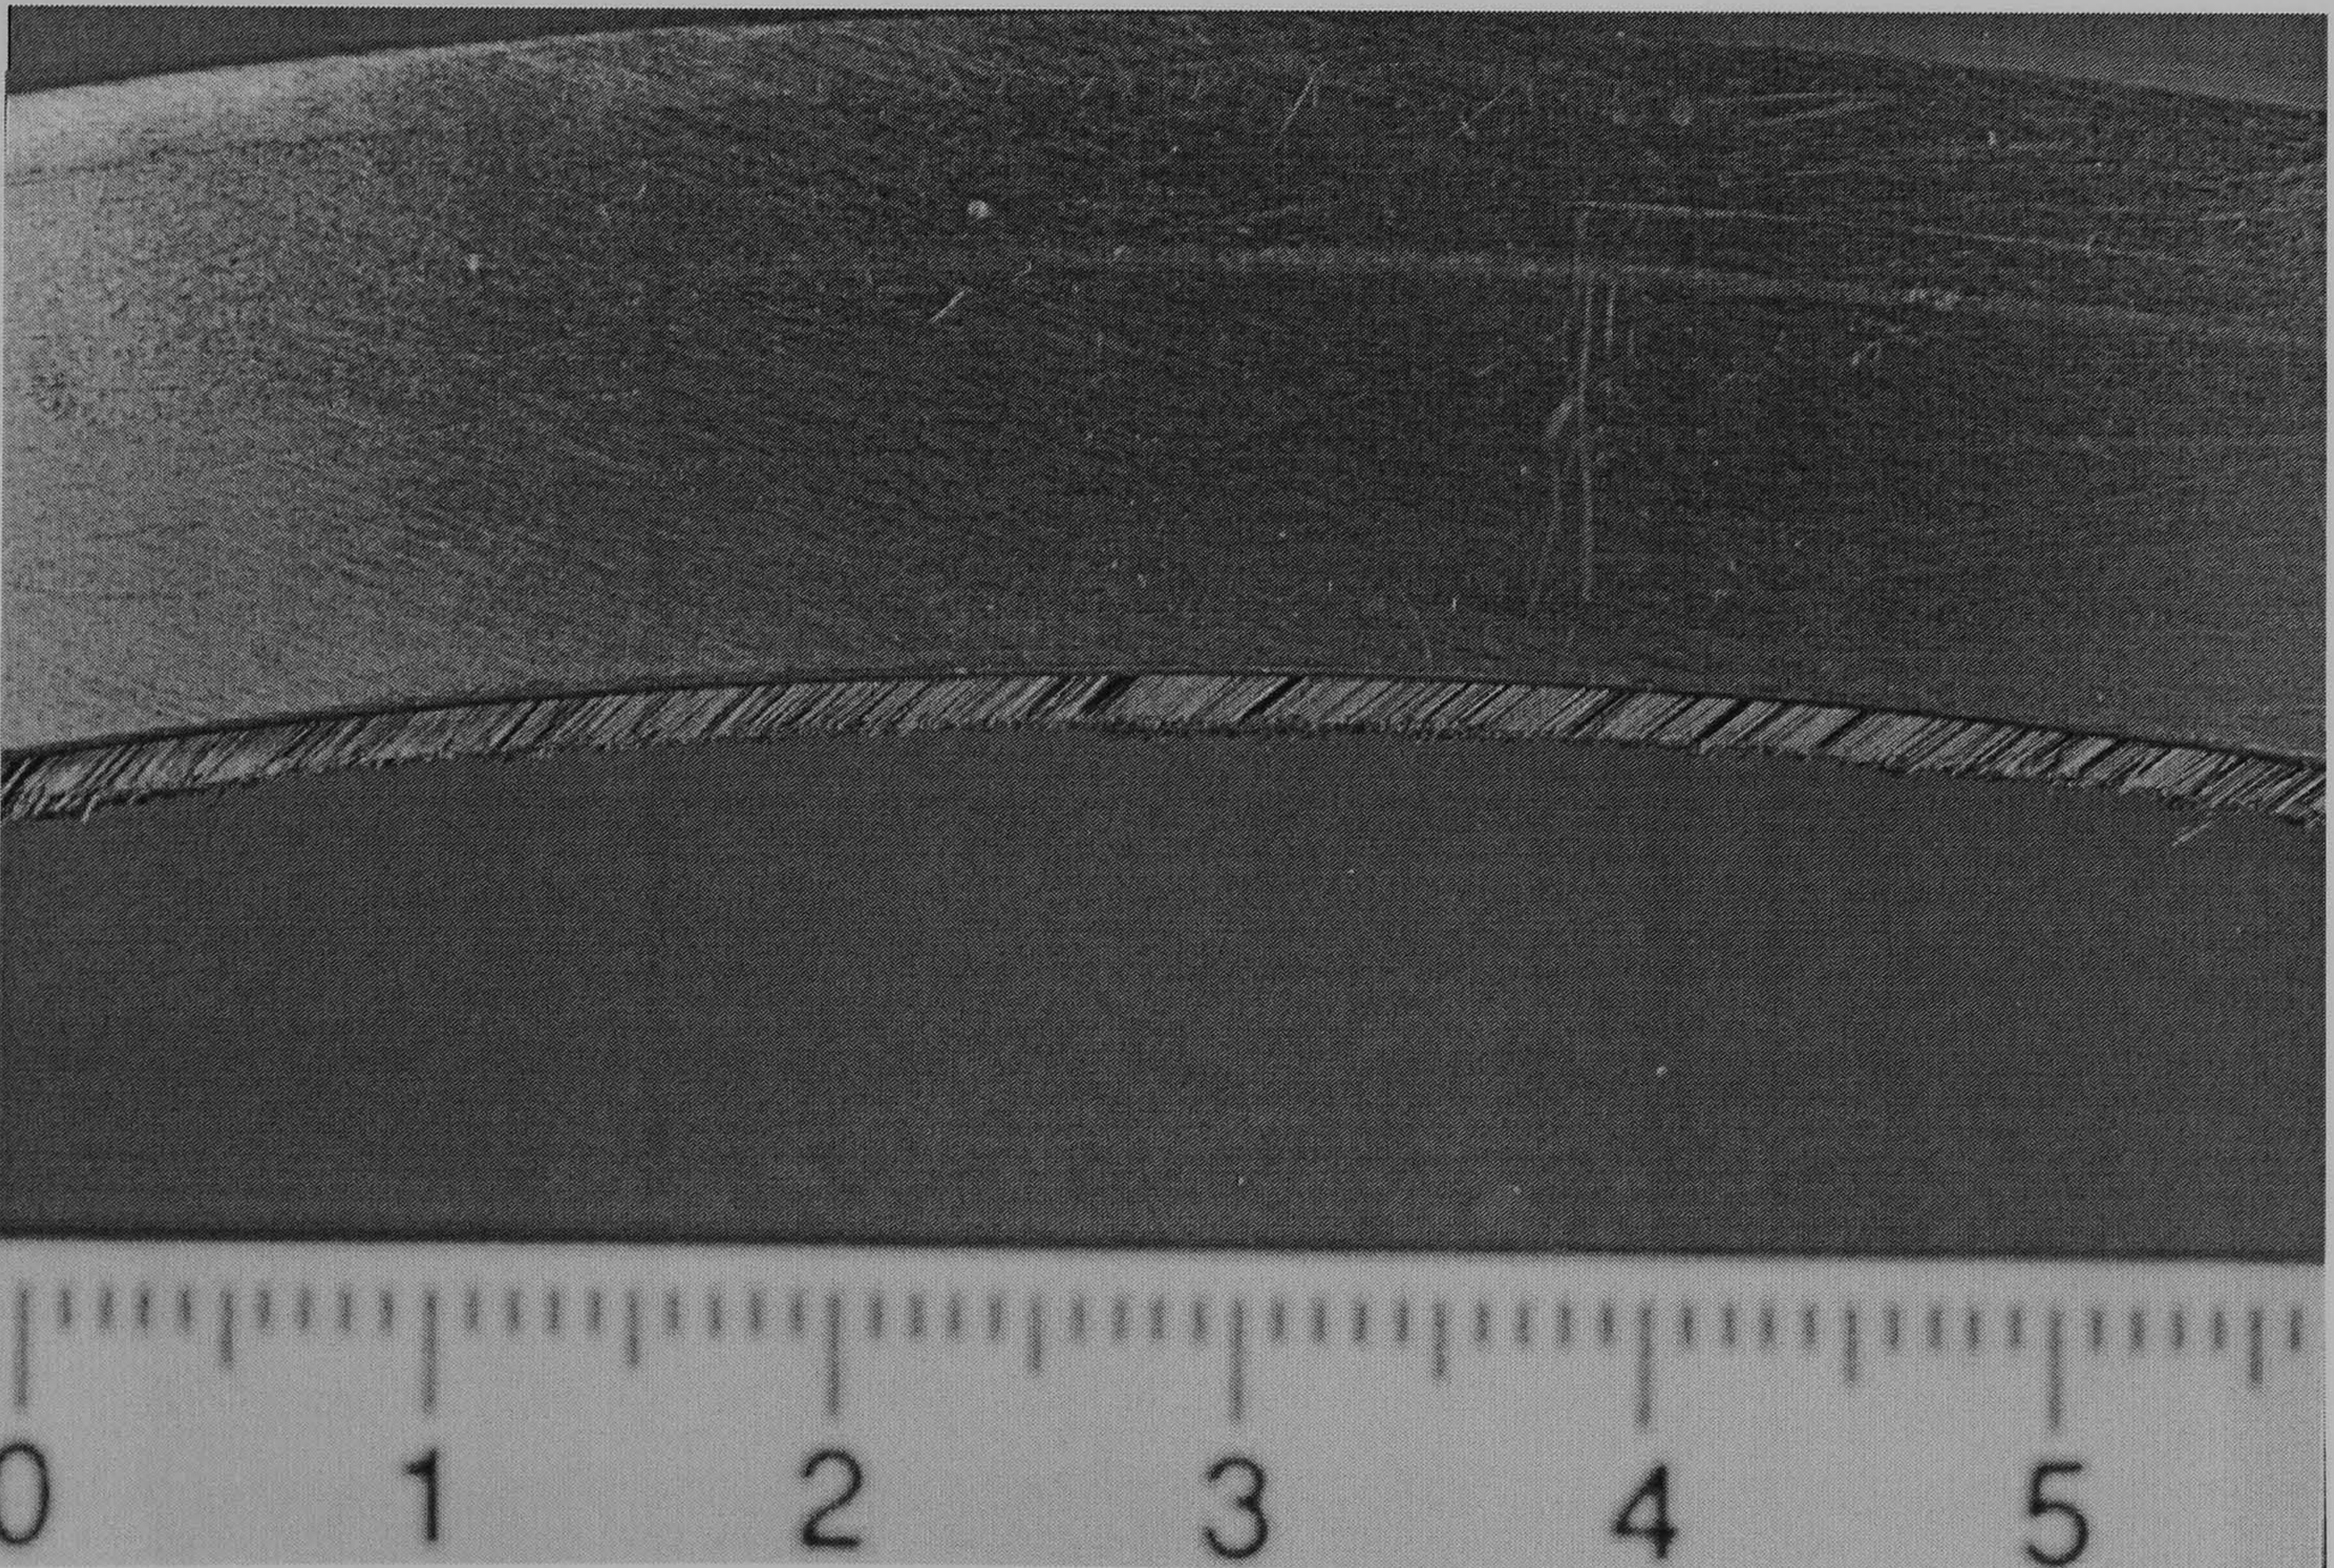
Back view (low pressure side) of a brush seal showing the backing ring/plate and bristle overhang.
